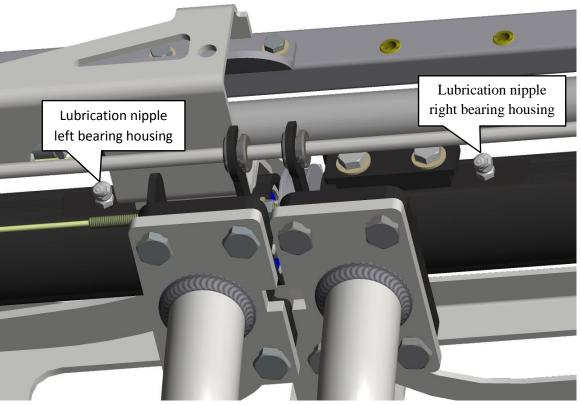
Apply multipurpose grease (Q8 Rembrandt EP-2) to bearing housings
